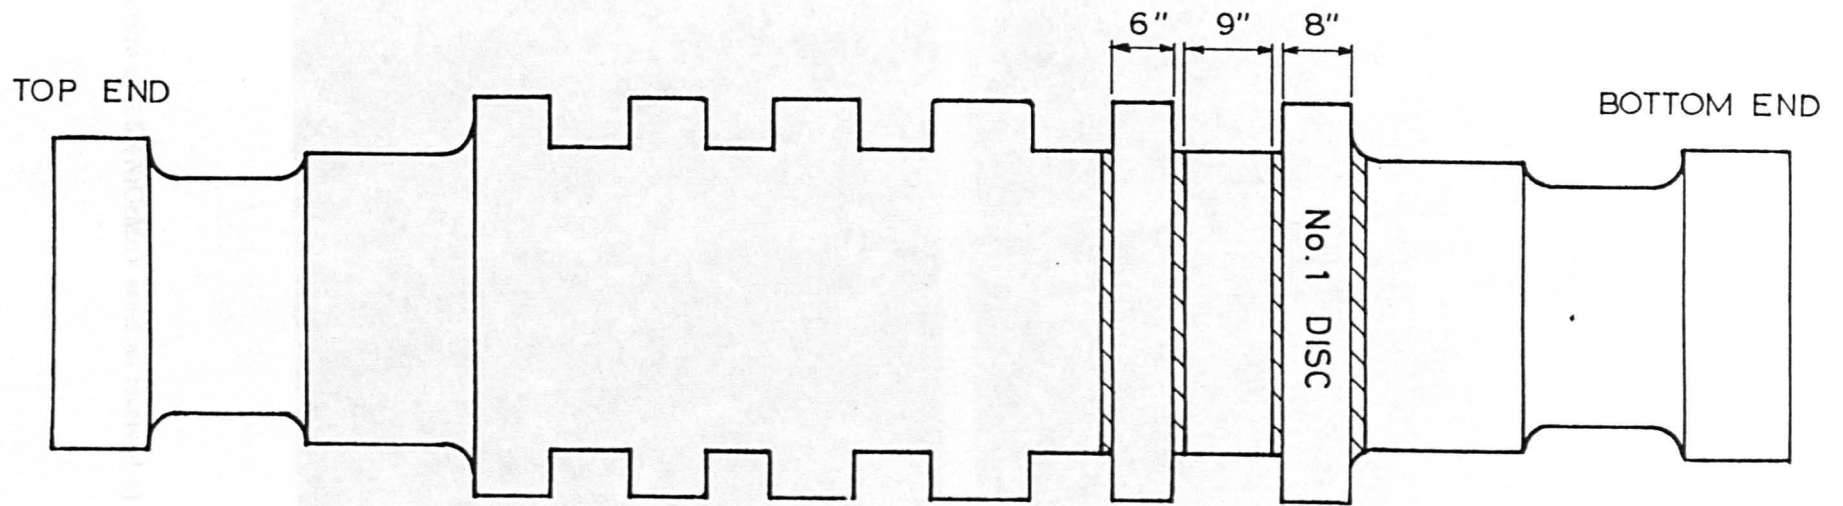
Drawing of a low pressure rotor shaft showing the location of disc
